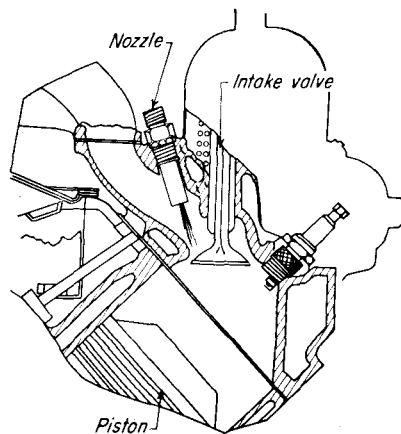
Simplified view showing method of injecting fuel into intake manifold just back of the intake valve.
